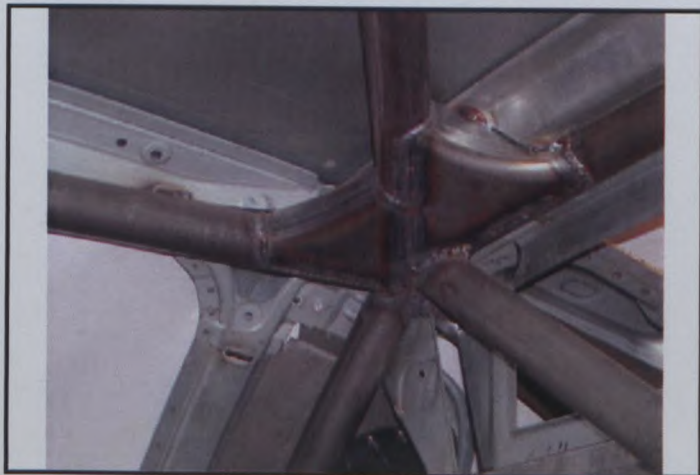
main roll bar to longitudinal member and rear diagonal removable member (left side)
